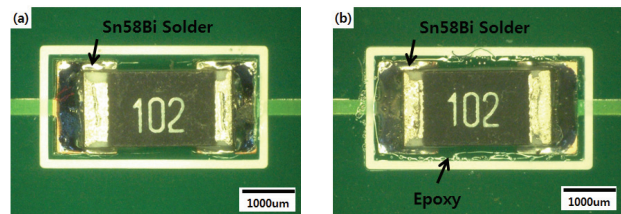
Shape of specimens (a) pure Sn58Bi solder specimens and (b) epoxy solder specimens.
